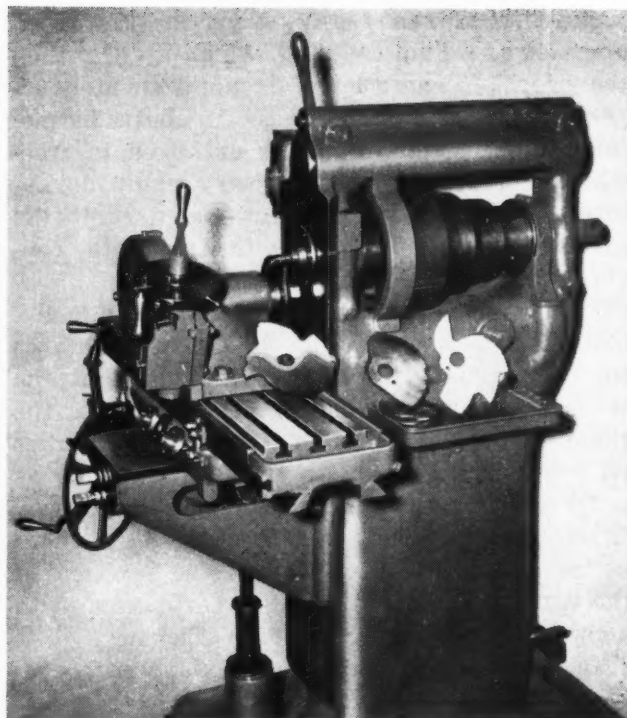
Cam Cutting Attachment Mounted on a Milling Machine. Several Completed Cams are Shown on the Machine
